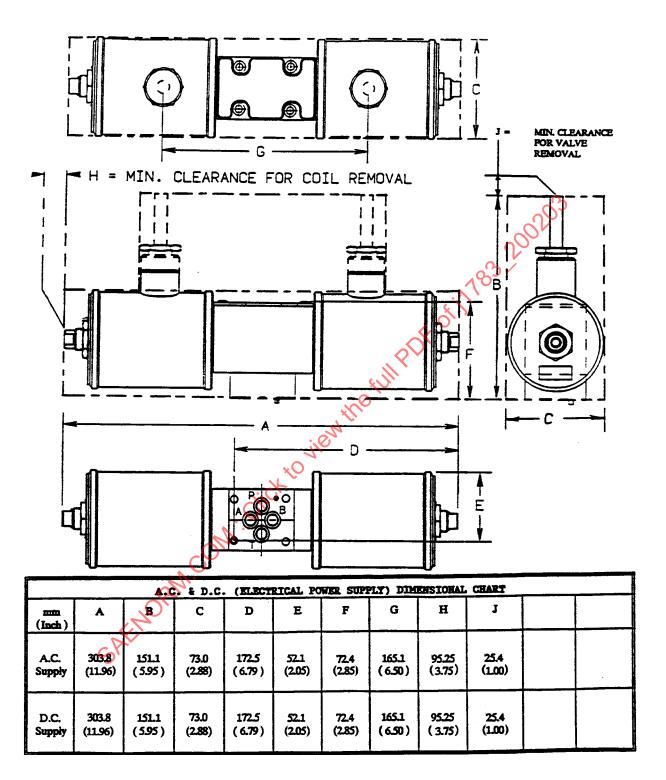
ANSI D03 SOLENOID OPERATED DIRECTIONAL CONTROL VALVE EXPLOSION PROOF
